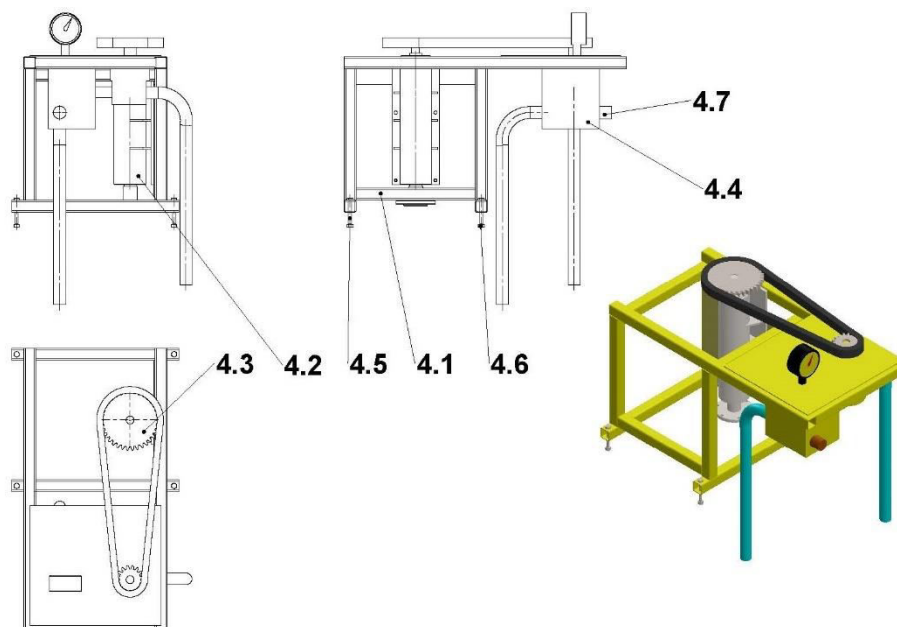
Assembly-mounting drawing and isometric view of load simulation device
